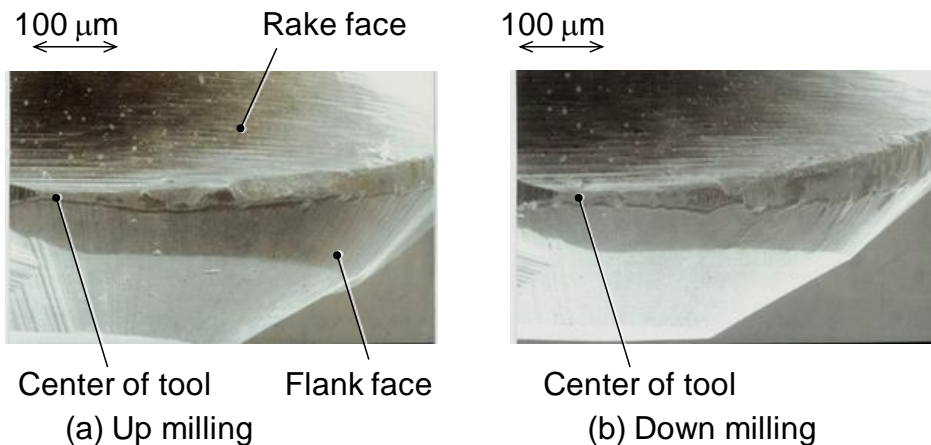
41 Flank wear of ball end mill in up milling and down milling.
